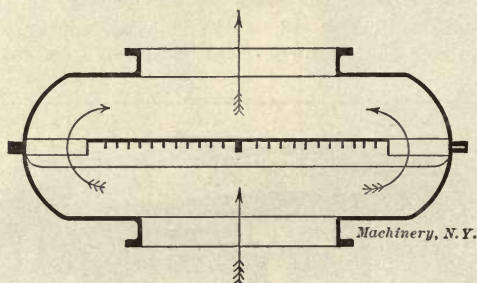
Horizontal Section through Oil Separator in Fig. 10
